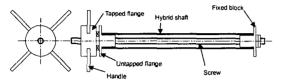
Assembly drawing of the compressive jig and the hybrid shaft.
